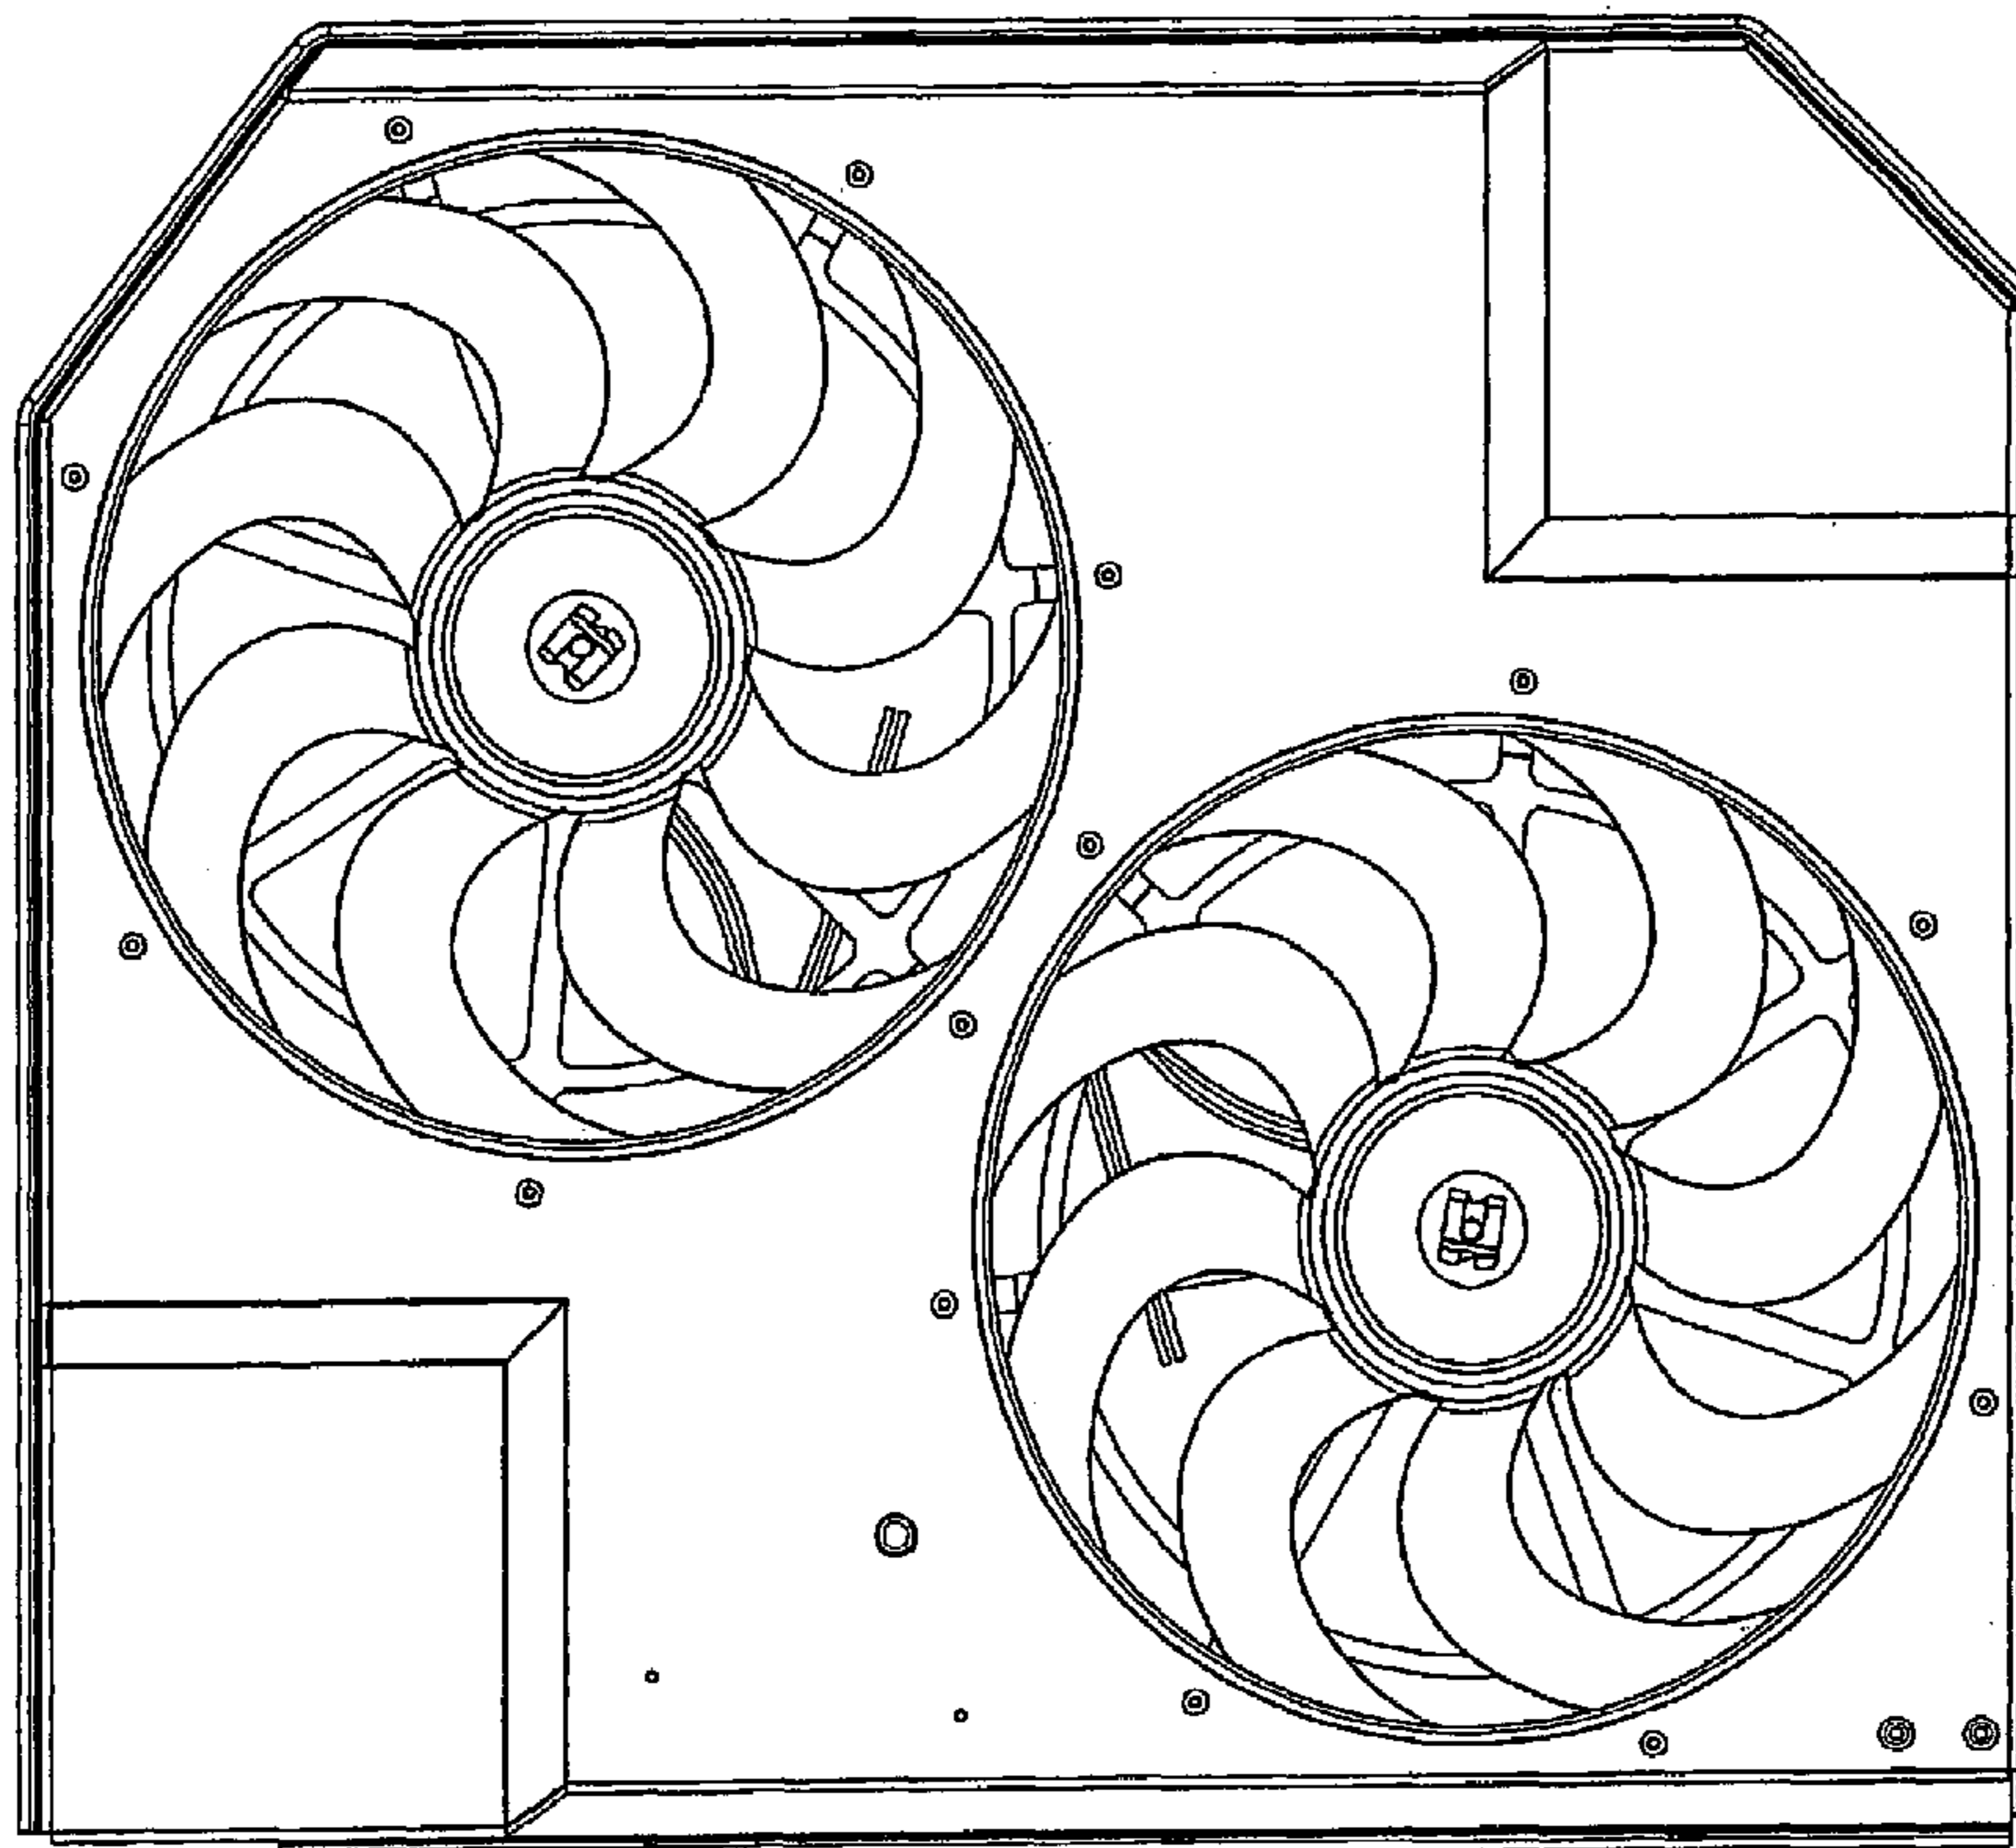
is a top view of the combined dual fan assembly and shroud with spiderweb support.
